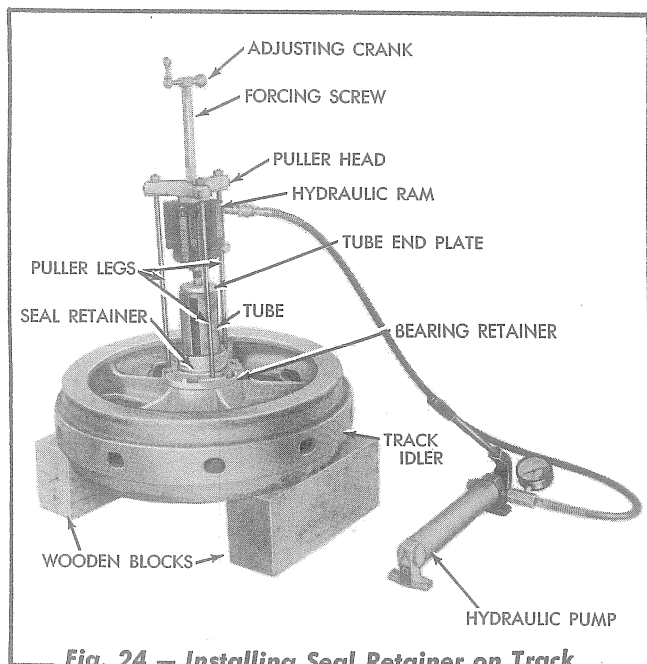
Installing Seal Retainer on Track Idler Shaft
